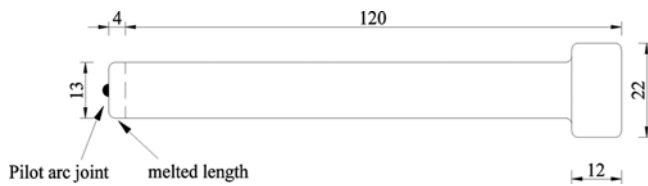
Dimensions of the Cheese Head Stud (mm)
